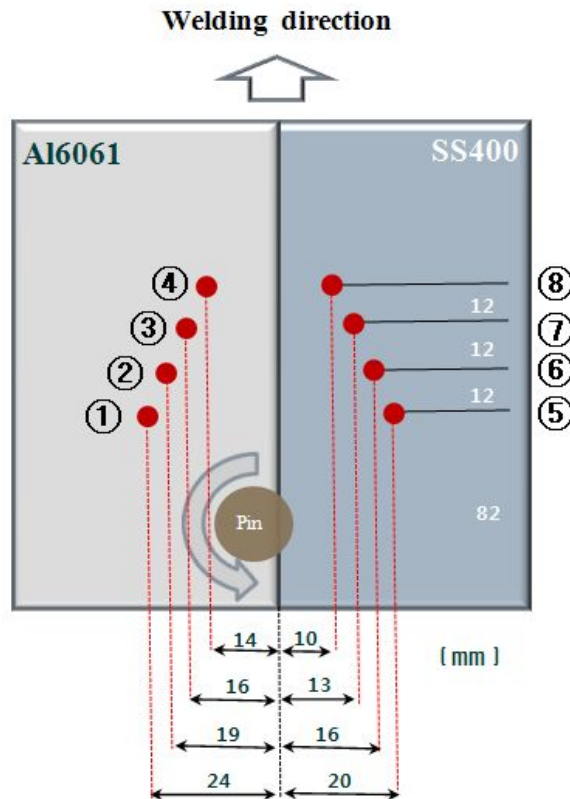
Temperature measurement points in welds by thermo-couple
